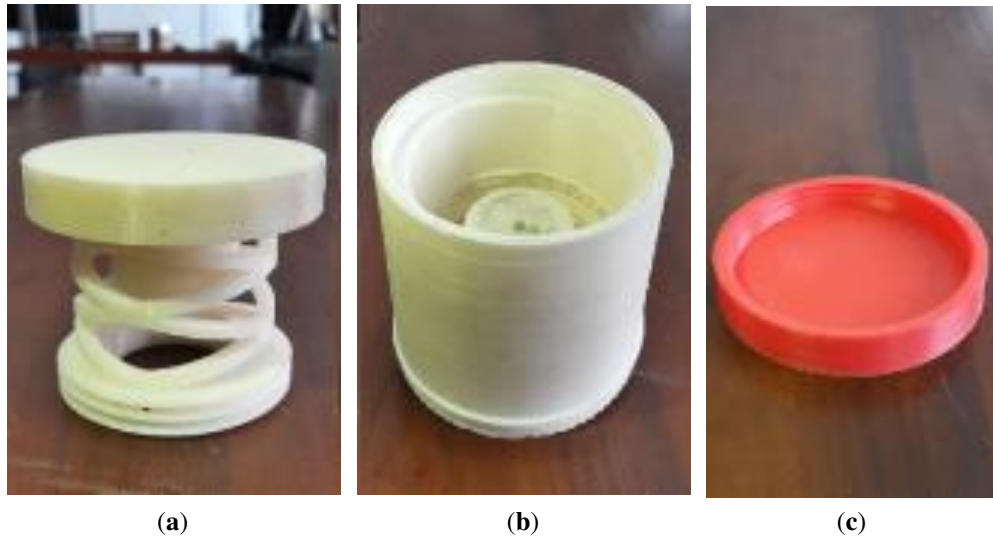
3D printed parts of the force sensor: (a) cylindrical arch spring; (b) outer protection; (c) bottom pad.
